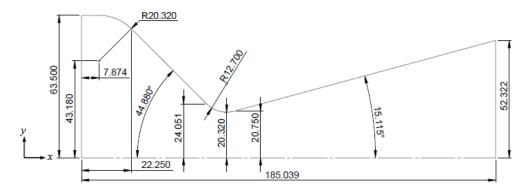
BGM45-15 nozzle profile with dimensions in millimeters.
